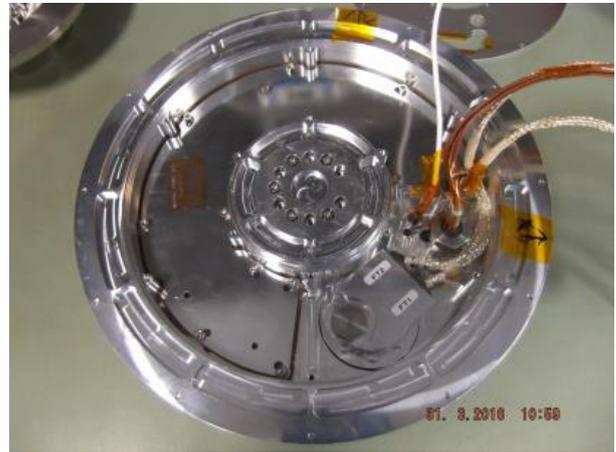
ACM ready for disassembly (mechanism still in vacuum)
